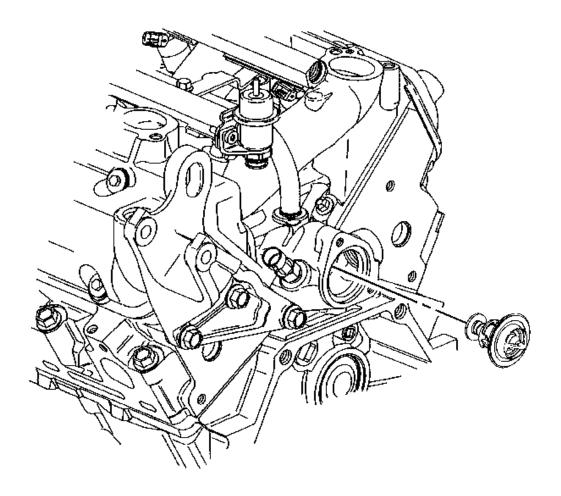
Removing Thermostat Courtesy of GENERAL MOTORS CORP.
